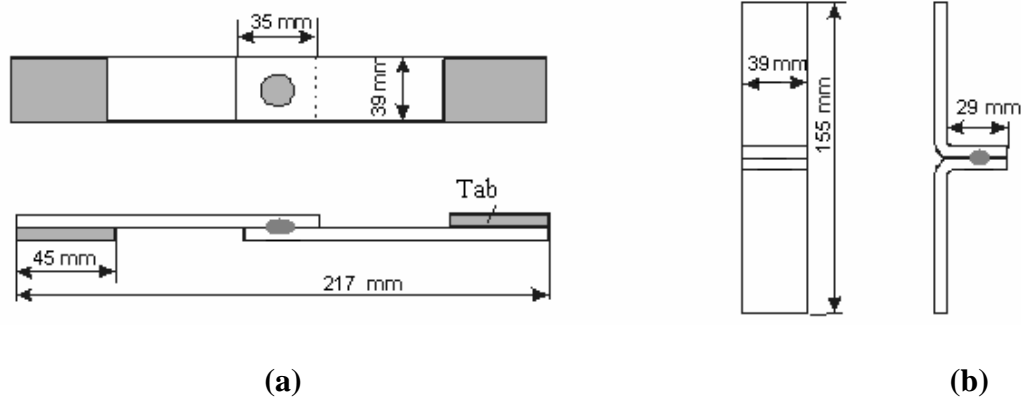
(a) Tensile shear type and (b) coach peel type fatigue specimens
